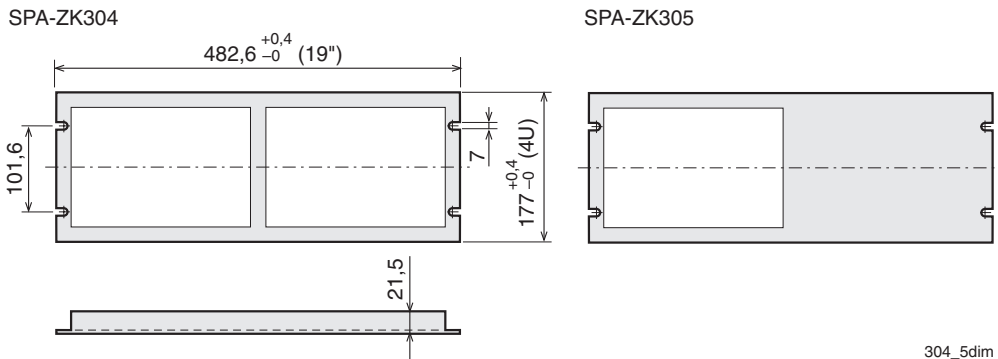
Mounting cabinets and frames (dimensions in mm)
